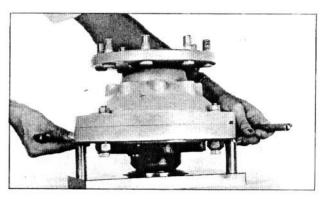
Measuring Gap Between Ring Gear and Gauge Posts
